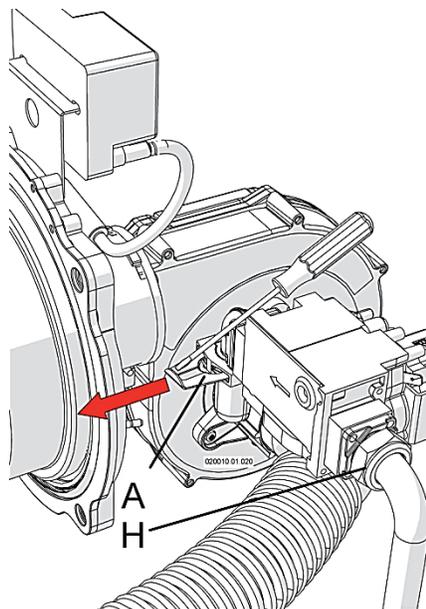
Removing the Nut & Spring from the Gas Valve
